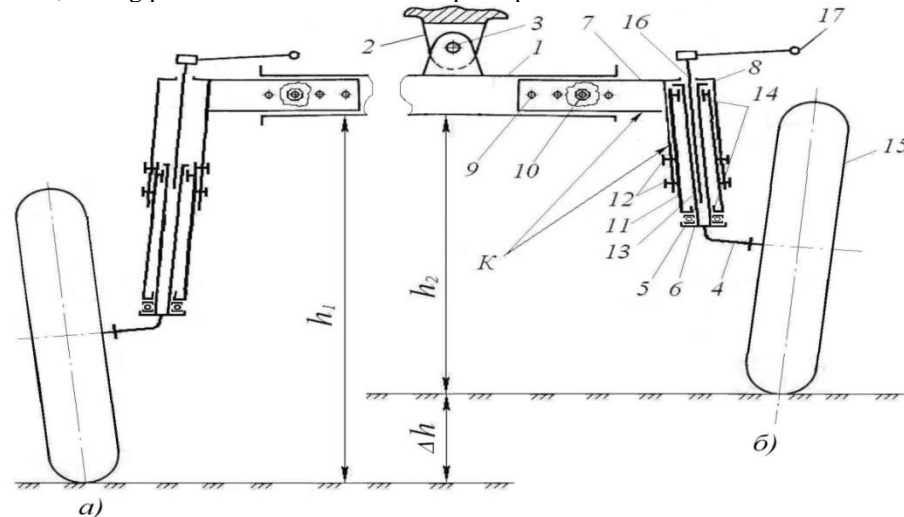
Scheme of the front axle of the tractor: a) high clearance b) low clearance
